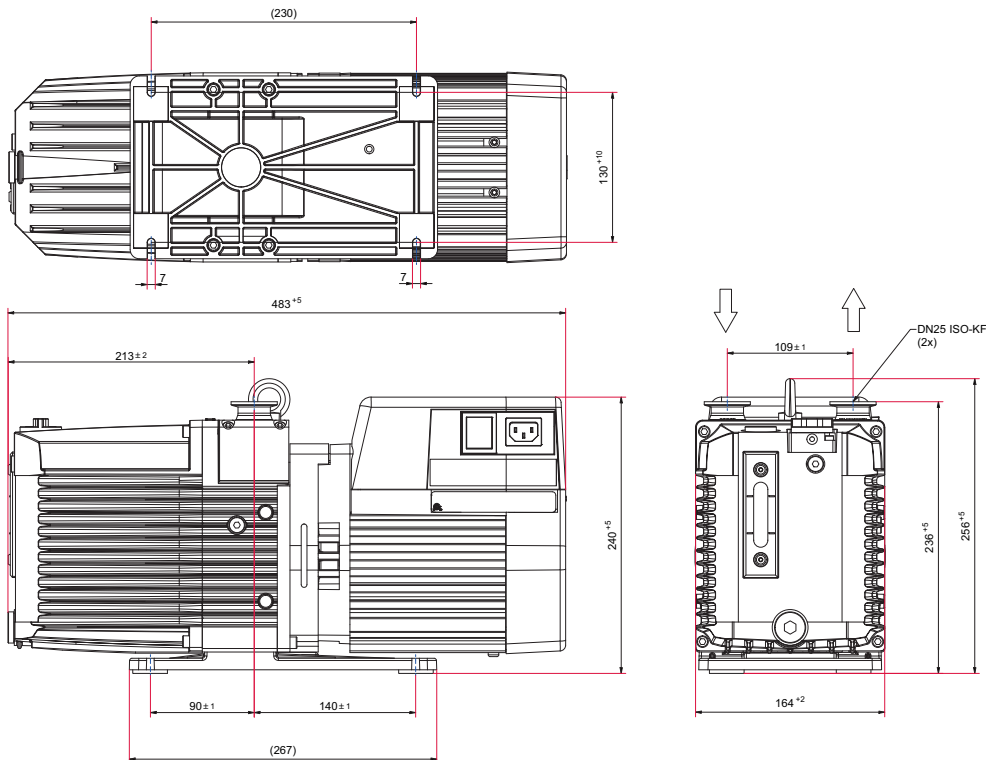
Dimensions DuoVane 22 with single-phase motor
